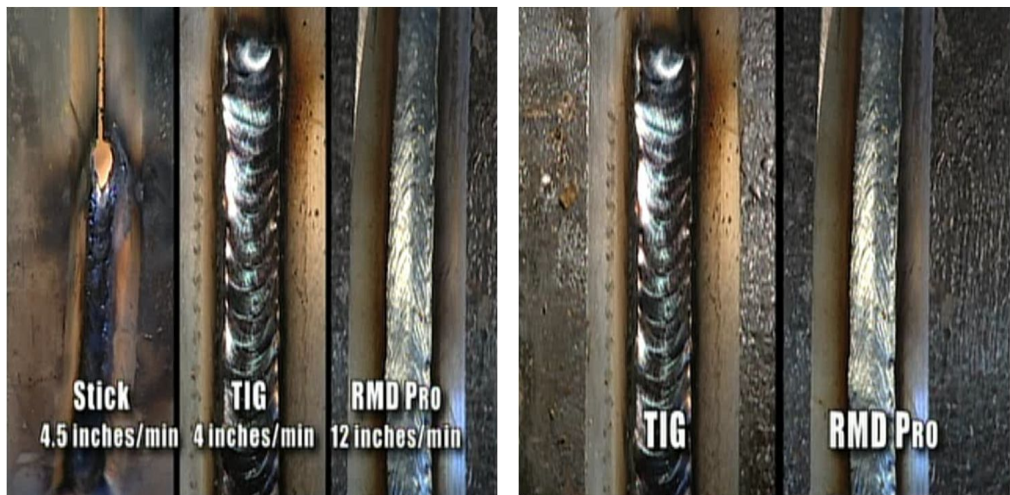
Comparative of bead on Root Pass welding
